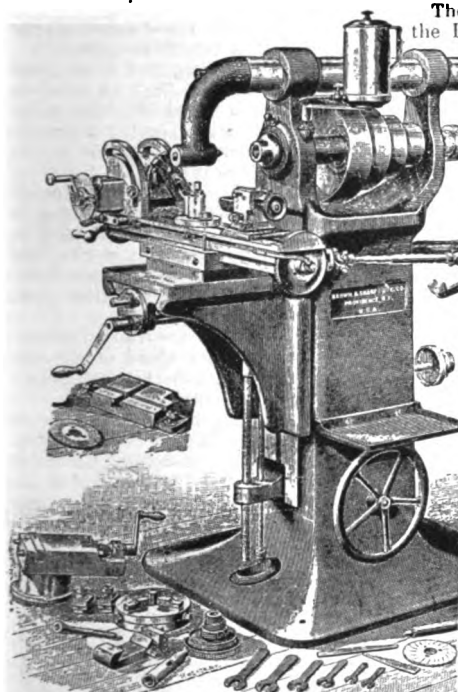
B. & S. UNIVERSAL MILLING MACHINE
